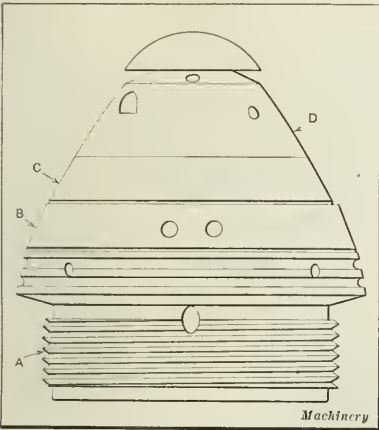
Assembled View of Russian 75-millimeter Shrapnel Fuse
